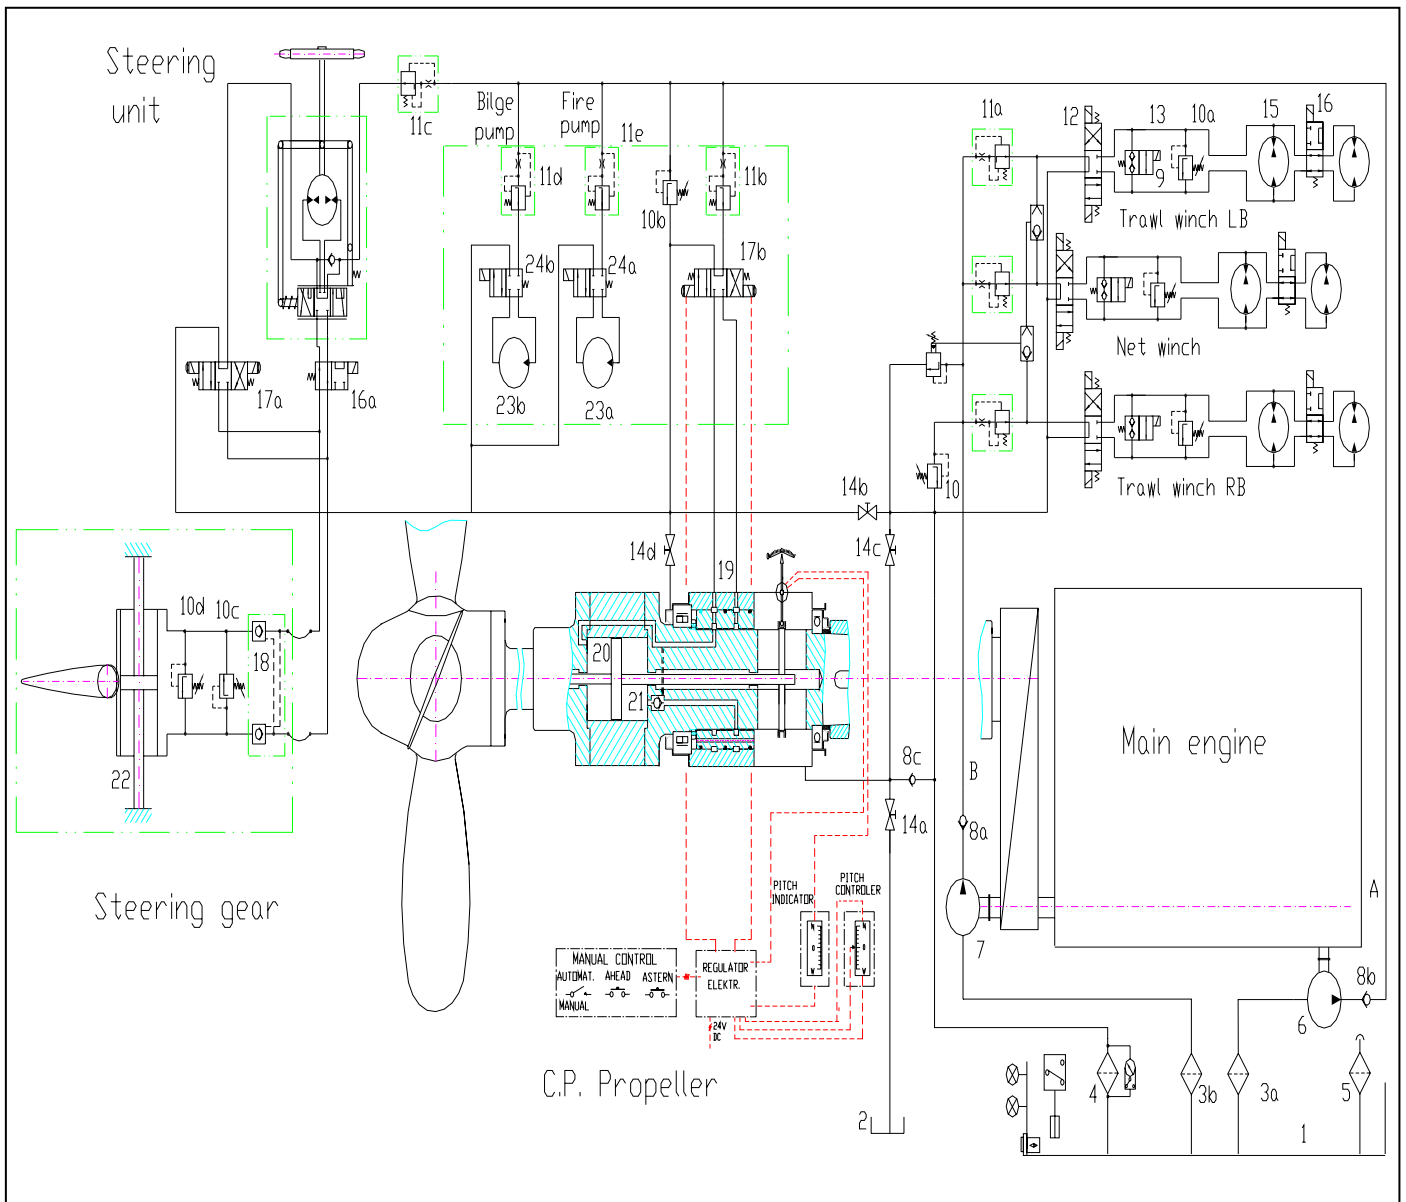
Scheme of the hydraulic drive and control of the equipment of the fishing cutter KR10 and the remote control system of the CP propeller.
